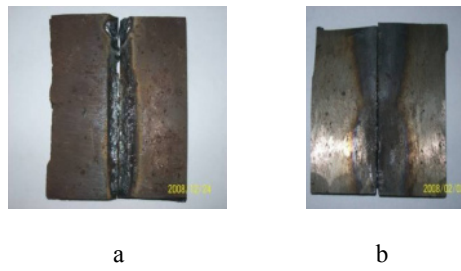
Examples of failed similar welded joints of DCI/DCI either (a) with preheat or (b) without preheat.
